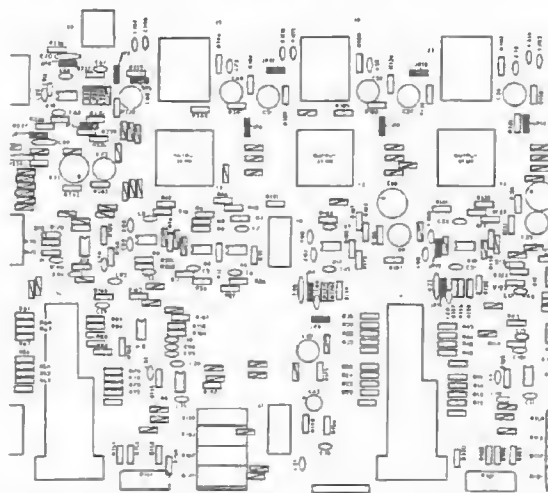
Transformer Mounting Locations. Jumpers to Cut are Shown as Solid Rectangles.
